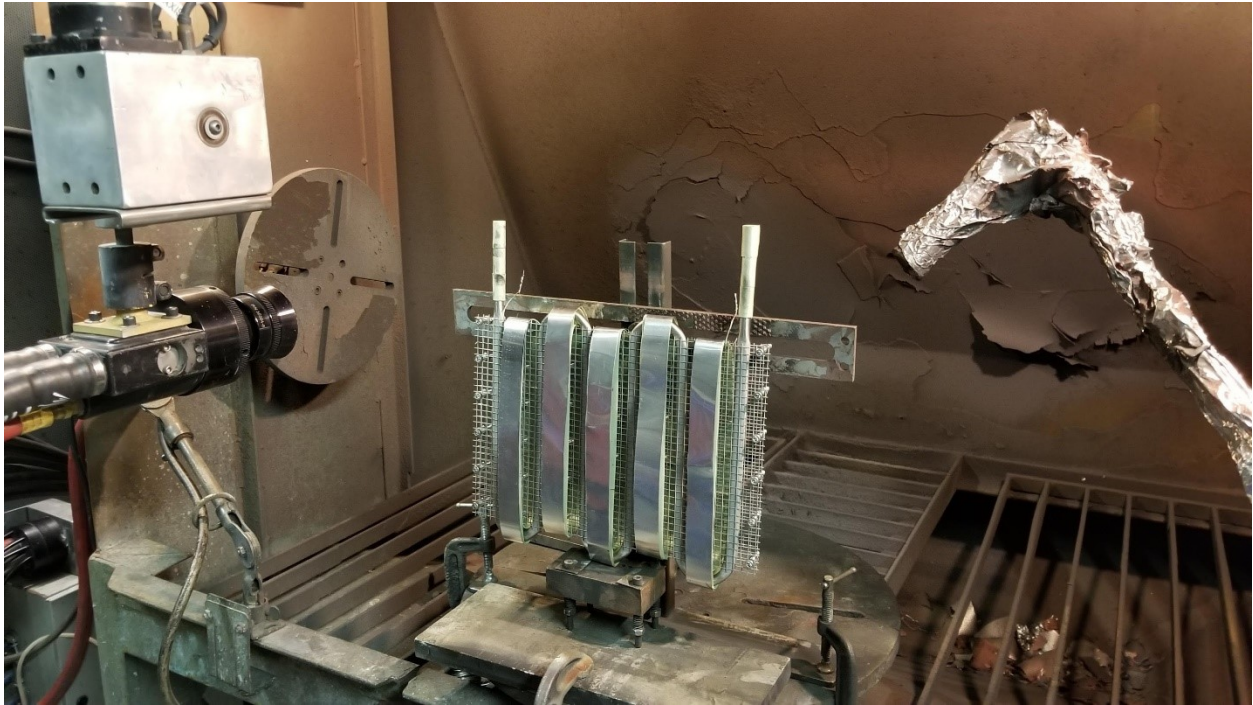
Heat exchanger tube with wire mesh fastened by screws and nuts, masked with aluminum sheet, hung from sample holder with wire, tube ends protected with masking tape
